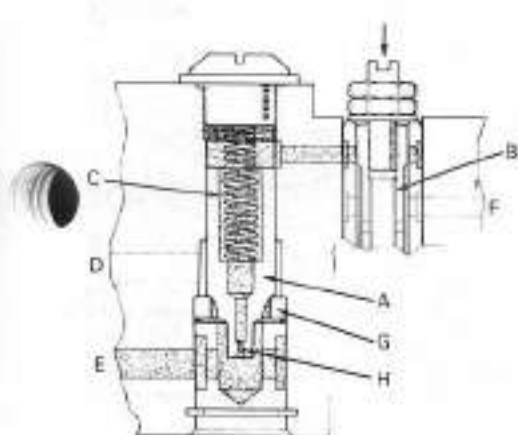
View showing pressure balanced valve operation. With spool valve (B) blocking passage from top side of valve plunger (A), pressure above valve is maintained via orifice (H) to same pressure as below valve in passage (E), thus spring (C) holds plunger on seat (G) closing outlet passage (D).
